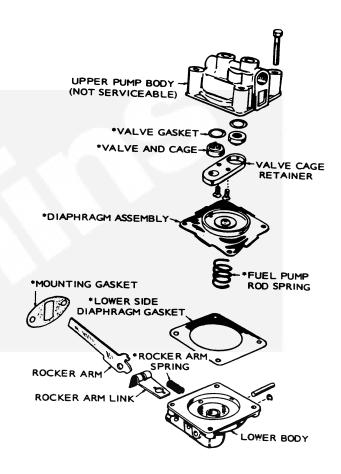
MECHANICAL FUEL PUMP - EXPLODED VIEW
